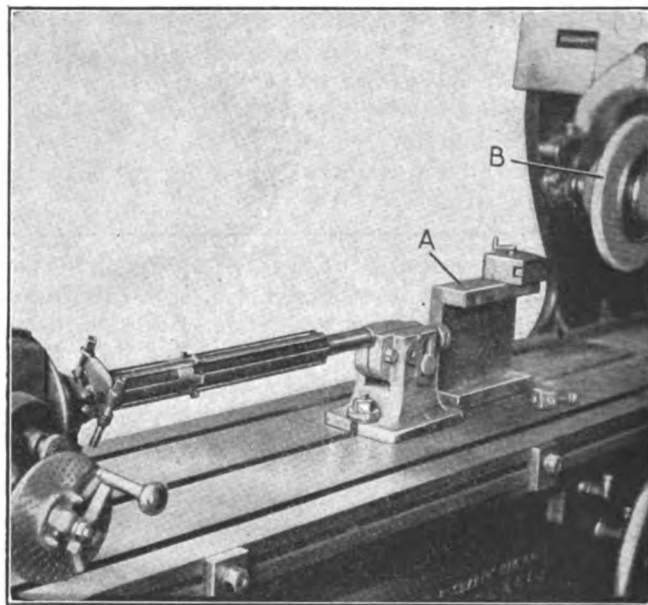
DRESSING FIXTURE IN POSITION ON PLANER TYPE GRINDER
